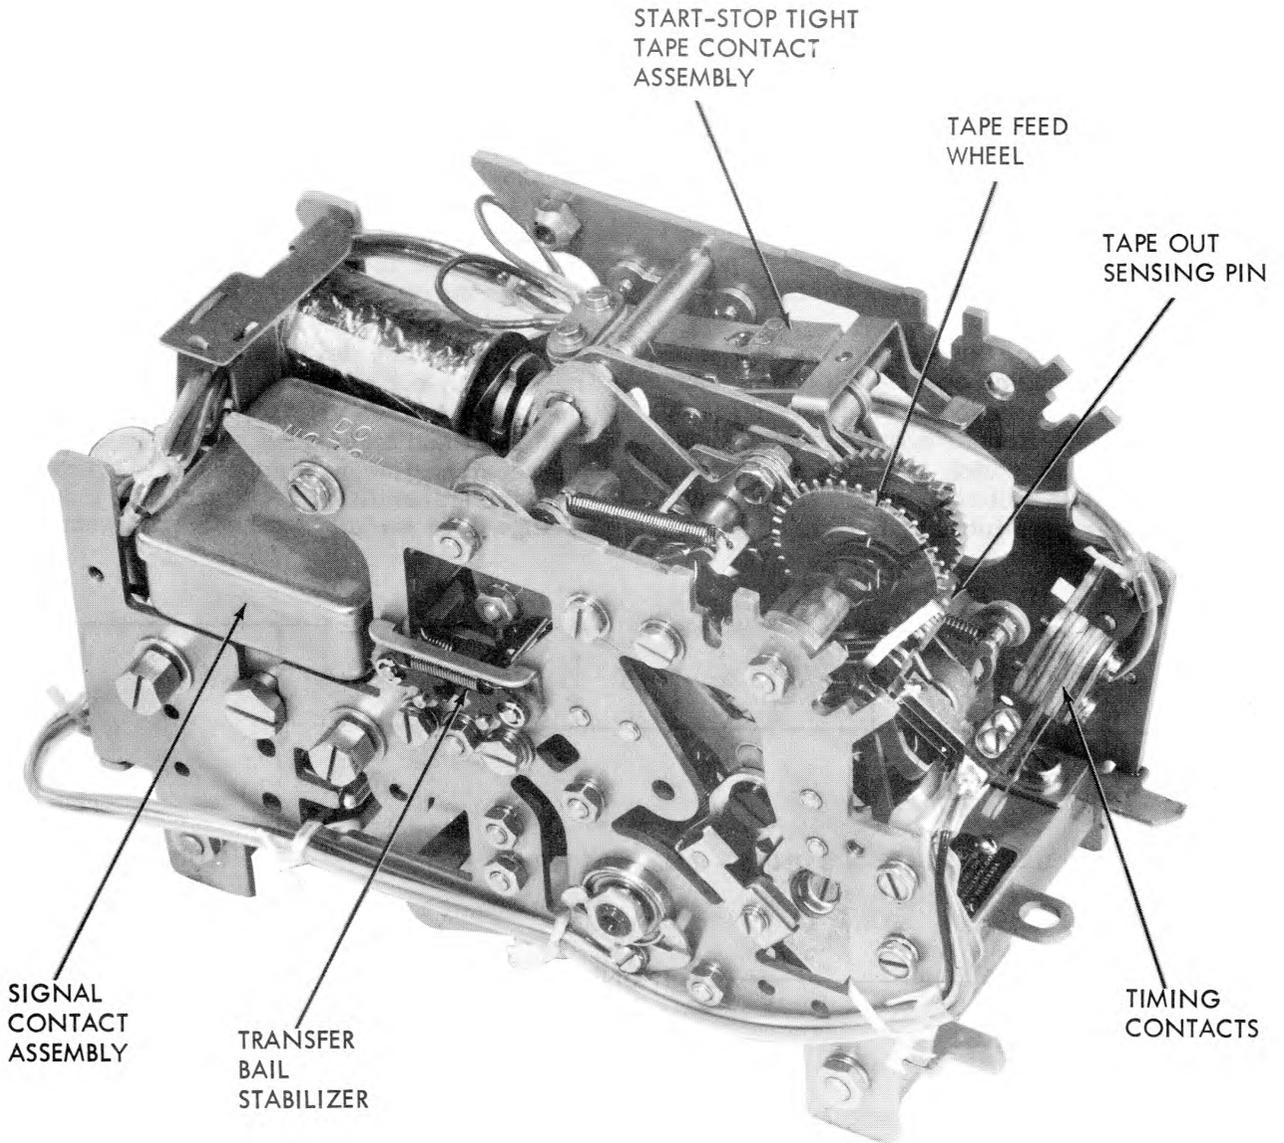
Transmitter Distributor, Covers Removed (Side View)
